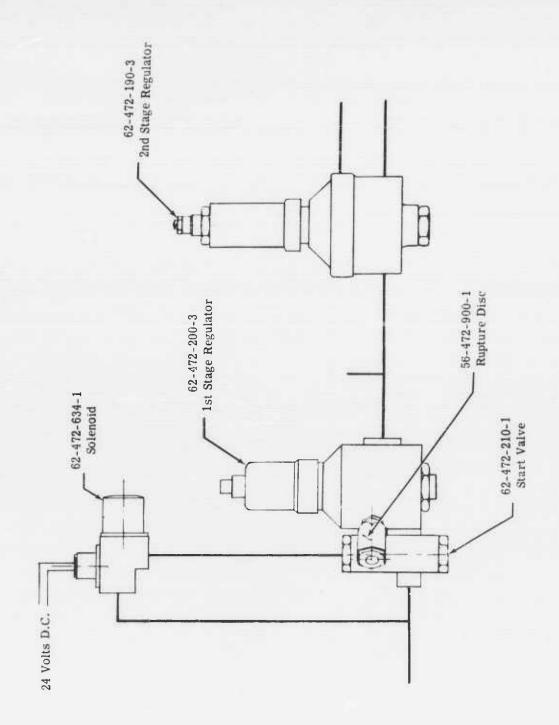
Regulator Pack Assembly 62-472-205 - Schematic
